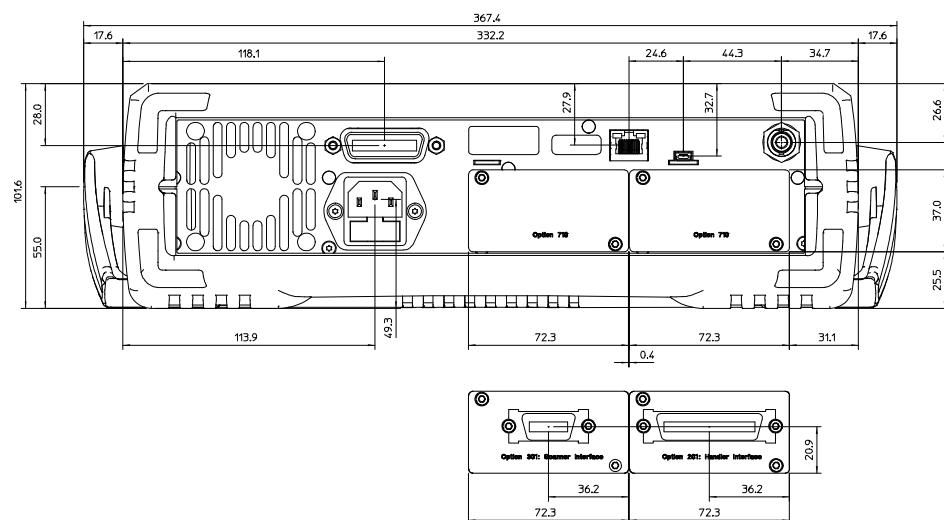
Dimensions (rear view, with handle and bumper, in millimeters, nominal)
